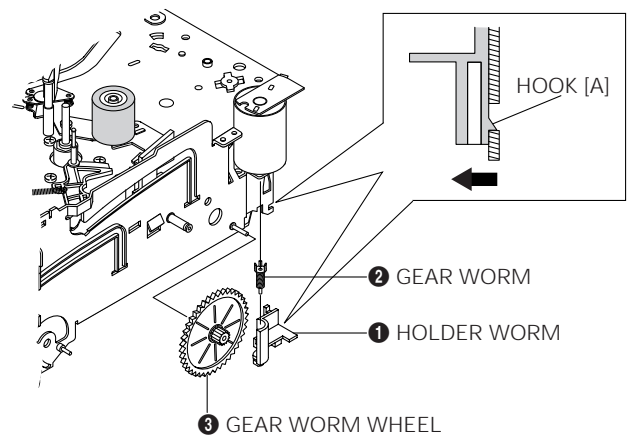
Holder Worm, Gear Worm, Gear Worm Wheel removal
